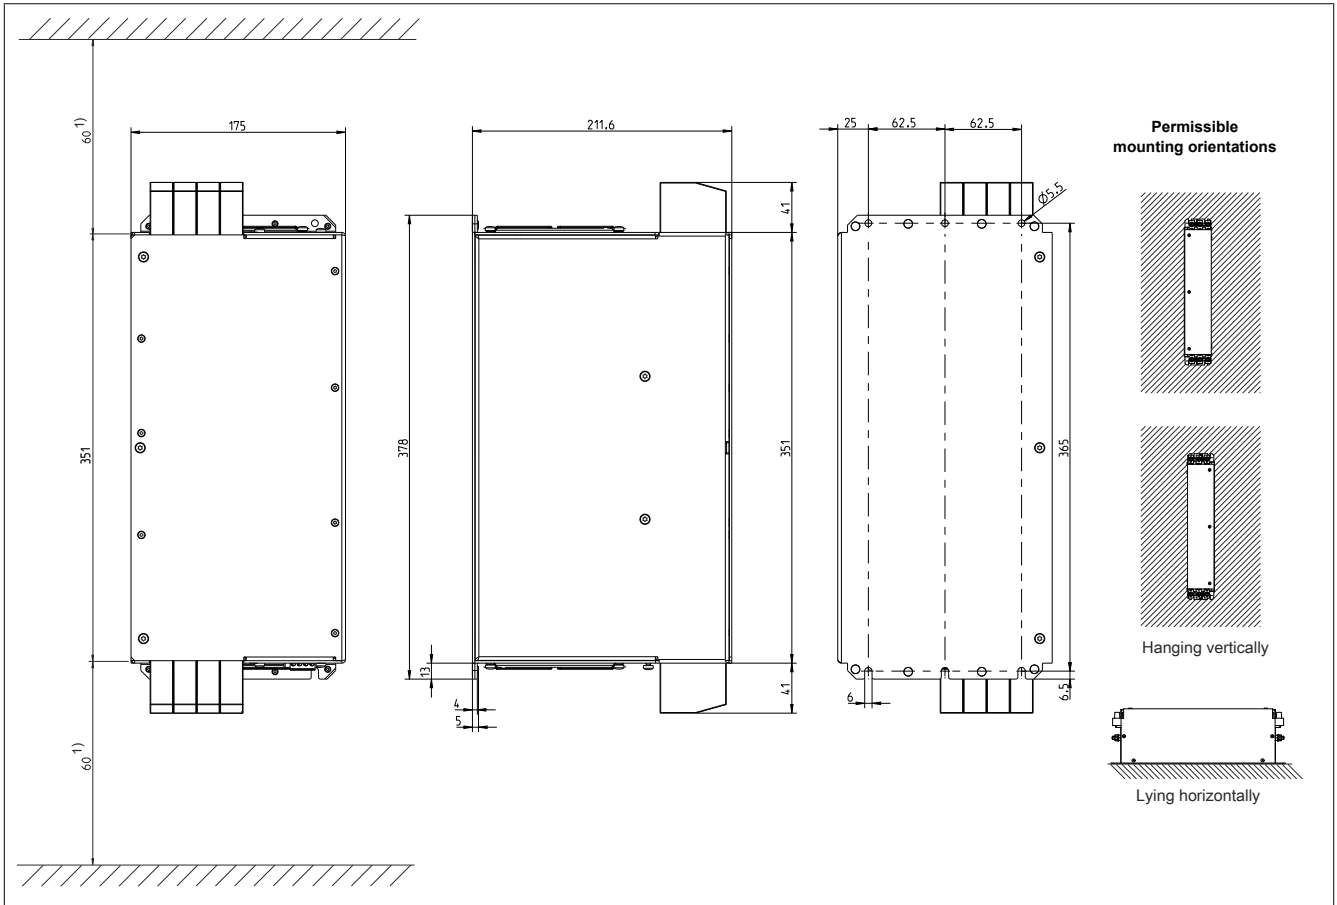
8BVF0880H000.000-1 - Dimension diagram and installation dimensions (revision F0 and later)
